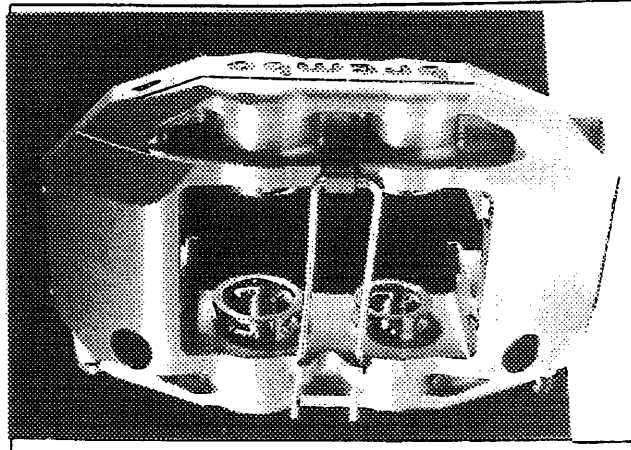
FRONT AND/OR REAR BRAKE CALIPER
